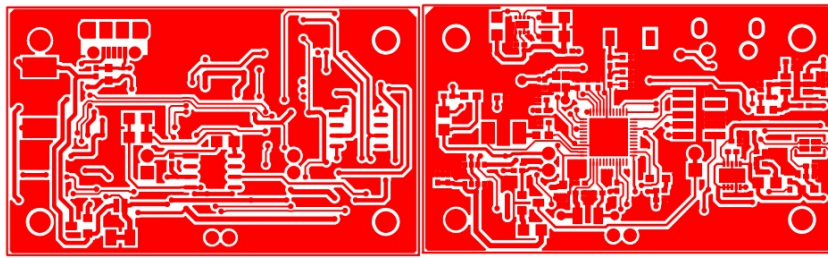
PCB layout of the Multisensor board ,Bottom and Top view respectively.
